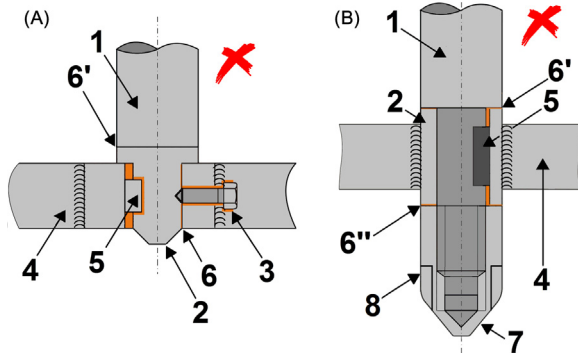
(A) The hub (2) is secured to the shaft (1) by means of a screw (3), which is exposed to product that may collect in and around the screw head. The hub-to-shaft connection gives rise to a metal-to-metal joint (6') that may permit the ingress of product and bacteria. Agitator blades (4) should be welded to the hub, although screw connections are sometimes observed. These exposed screw heads (even bolts with dome head nuts and washers of suitable food grade material) again will create a food safety hazard, and the blade-to-hub connection gives rise to a new metal-to-metal joint (6). To avoid the latter problem, the joint between the blade and the lug on the hub can be sealed by a thin gasket. Keyways (5) exposed to product are not recommended, because product and microorganisms may be retained in the keyway. Keyways may require additional design and/or cleaning practice to ensure drainage and cleanability, e.g., spray ball and wand additions, increased CIP flow and adjusted spray coverage. (B) Once the hub (2) is secured to the shaft (1), an end cap (impeller nut, 7) is screwed on the interior male thread end of the shaft. The nonwelded impeller hub-to-shaft and hub-to-end cap connections give rise to crevices and metal-to-metal joints (respectively 6' and 6'') that may allow the ingress of product and bacteria. In that way, the keyway (5) may retain product and microorganisms. The sharp corners of the spanner flats (8) on the end cap may be difficult to clean (Hauser et al., 2004b; Moerman and Kastelein, 2014).
